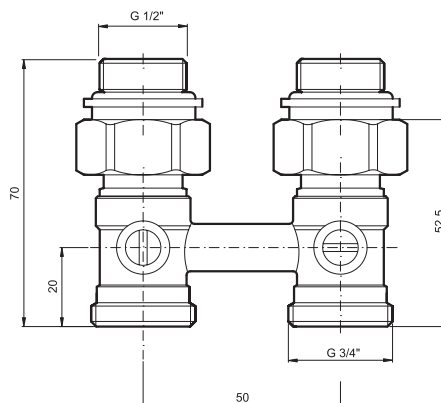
Dimensions Verafix-VKE angle with integrated cone
